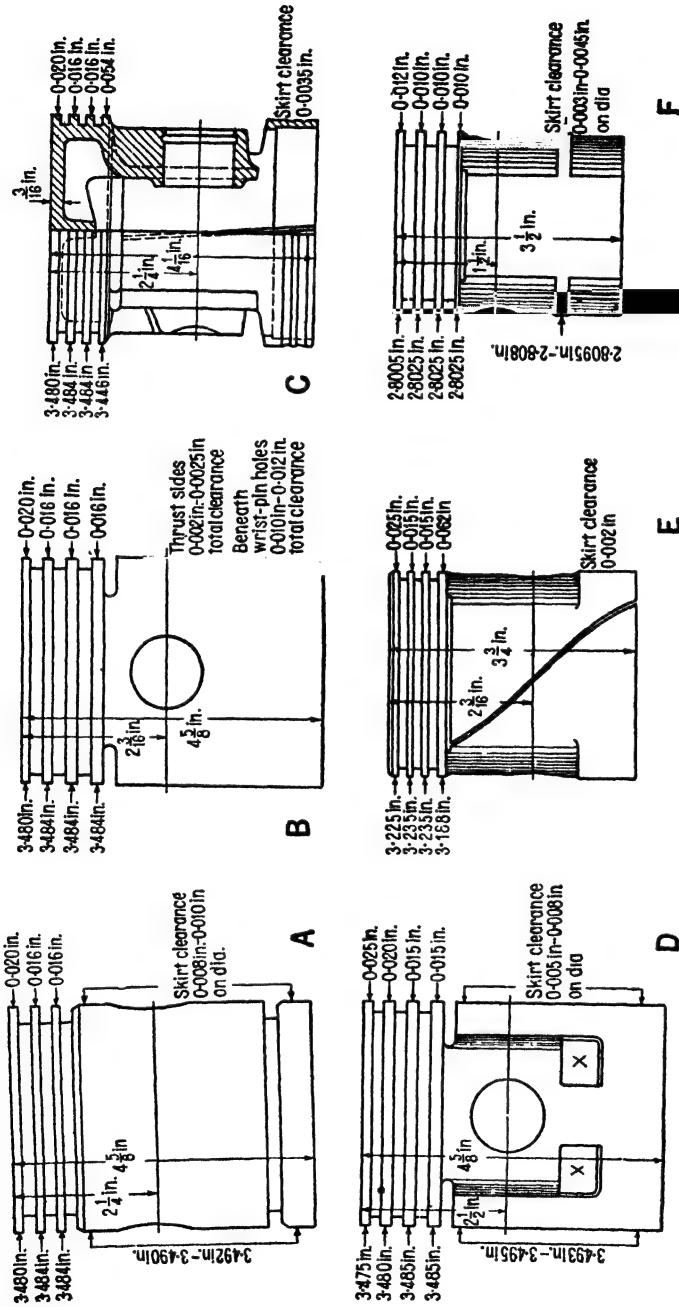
Diagrams Showing Recommended Clearances to be Allowed in Machining Various Types of Aluminum Alloy Pistons.
